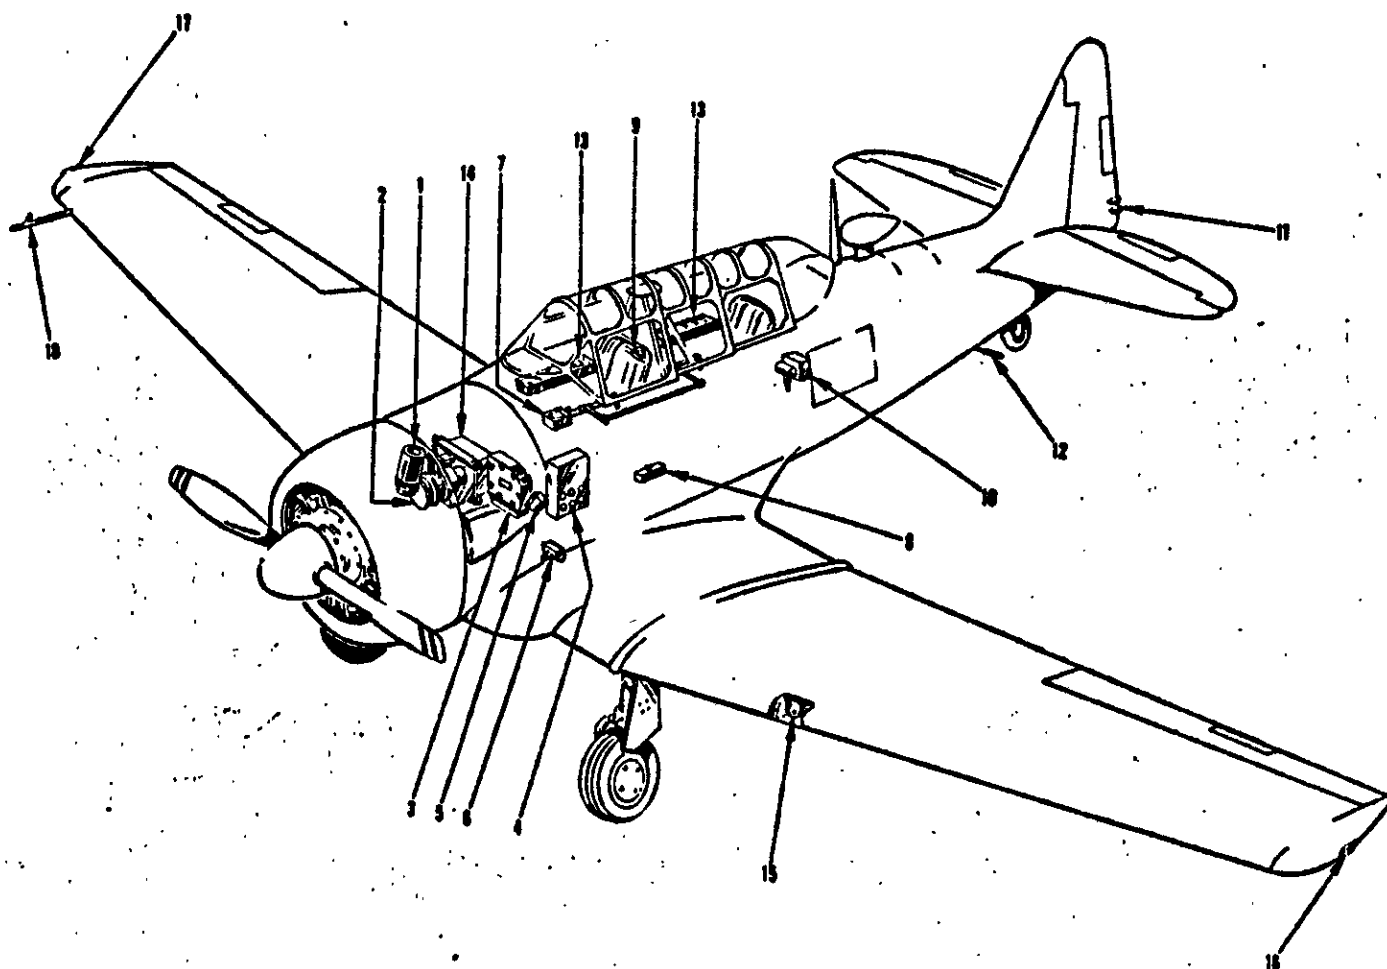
HYDRAULIC SYSTEM INSTALLATION
